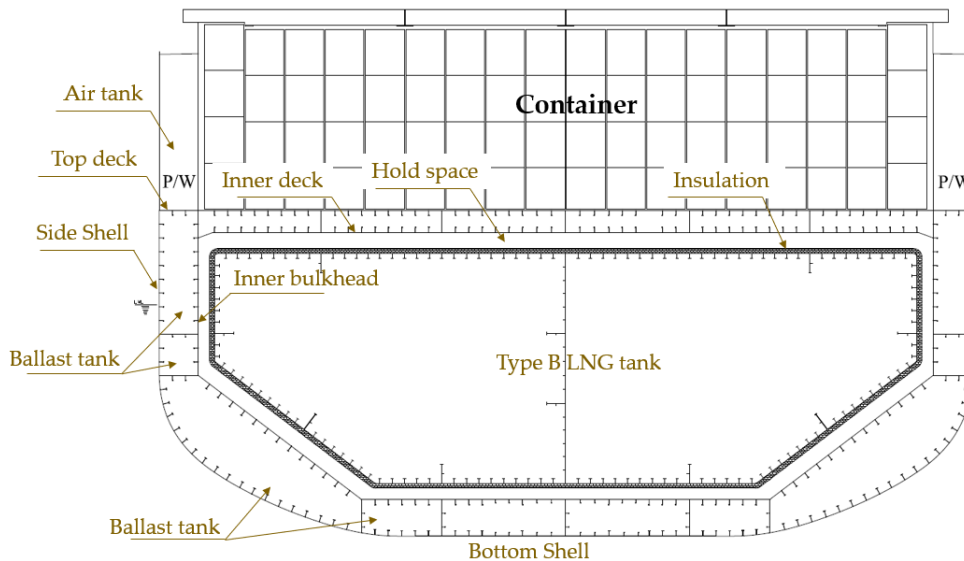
The arrangement of cargo hold and LNG fuel tank in container ship.
